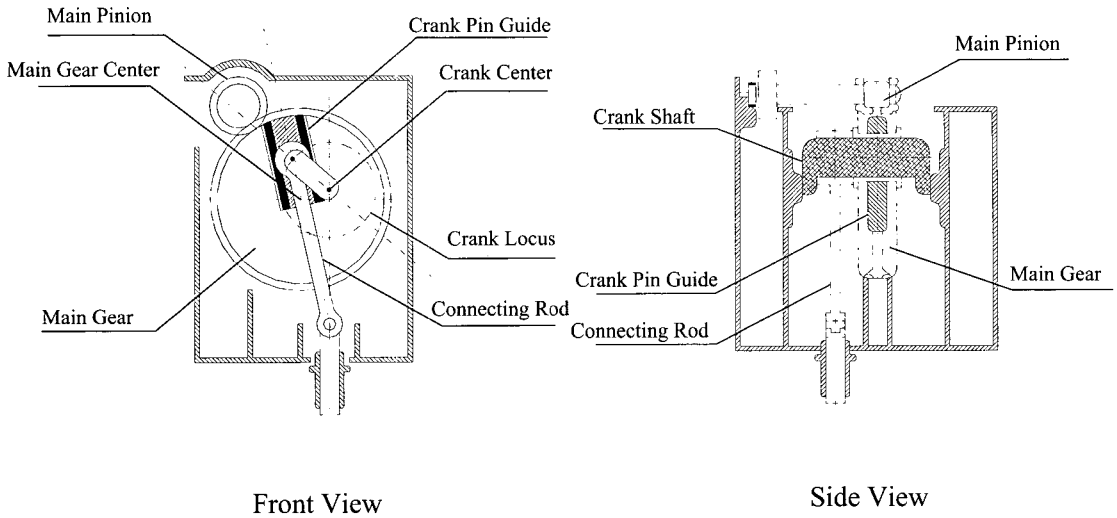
Driving mechanism of the press using linear crank-pin guide
